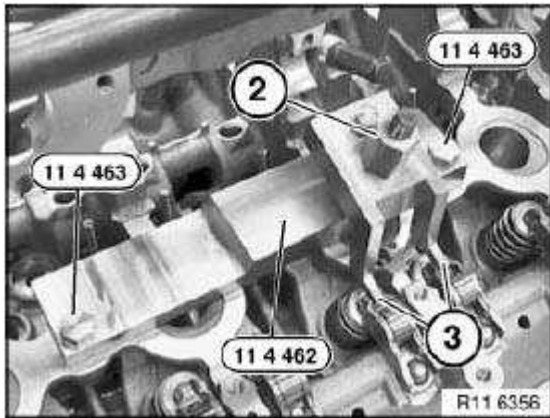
Cam Followers, Spindle Nut And Special Tools
